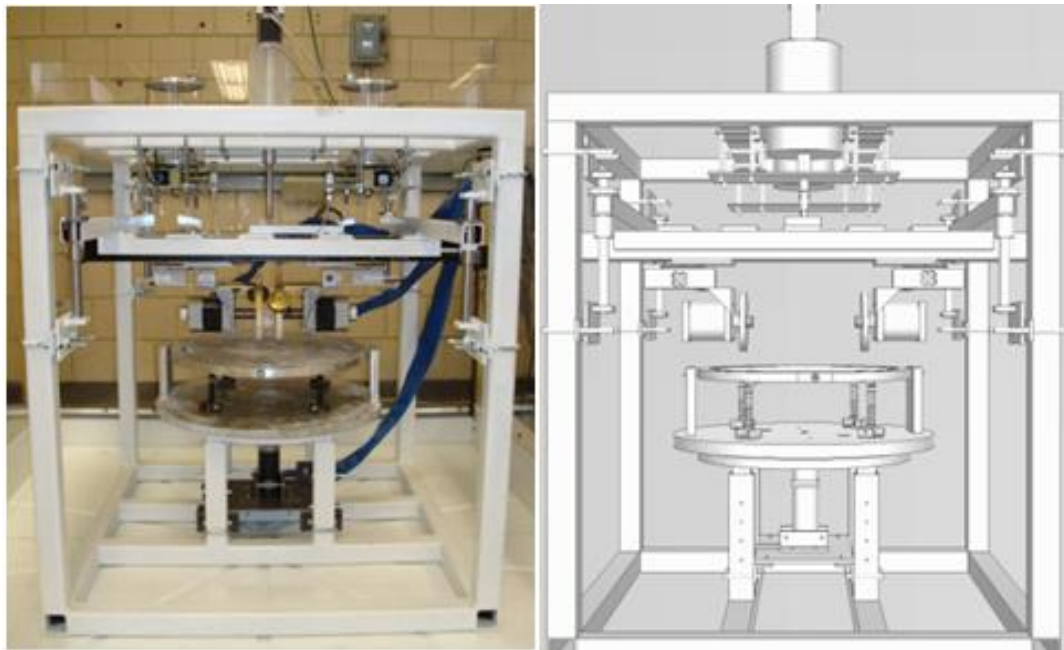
Physical Prototype & CAD Rendering of CMPG Machine
